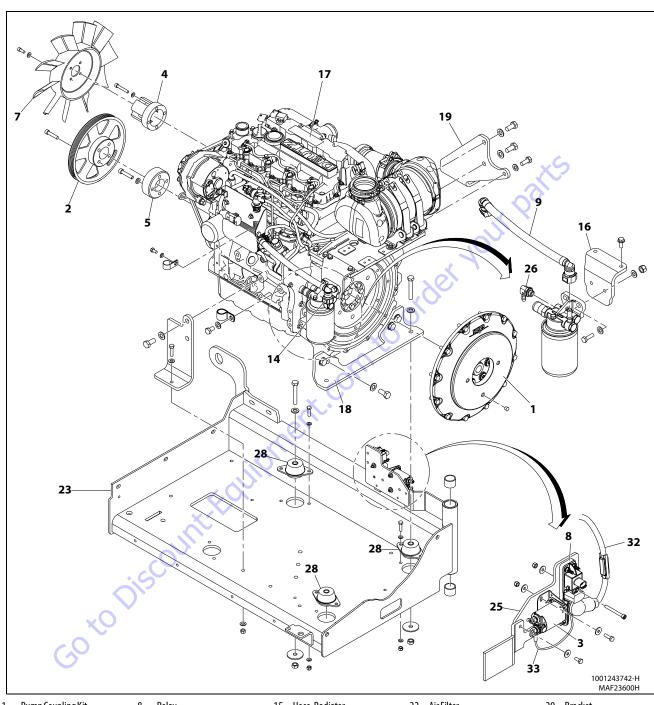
Deutz D2.9 L4 (49hp) Engine Assembly - Sheet 1 of 2
